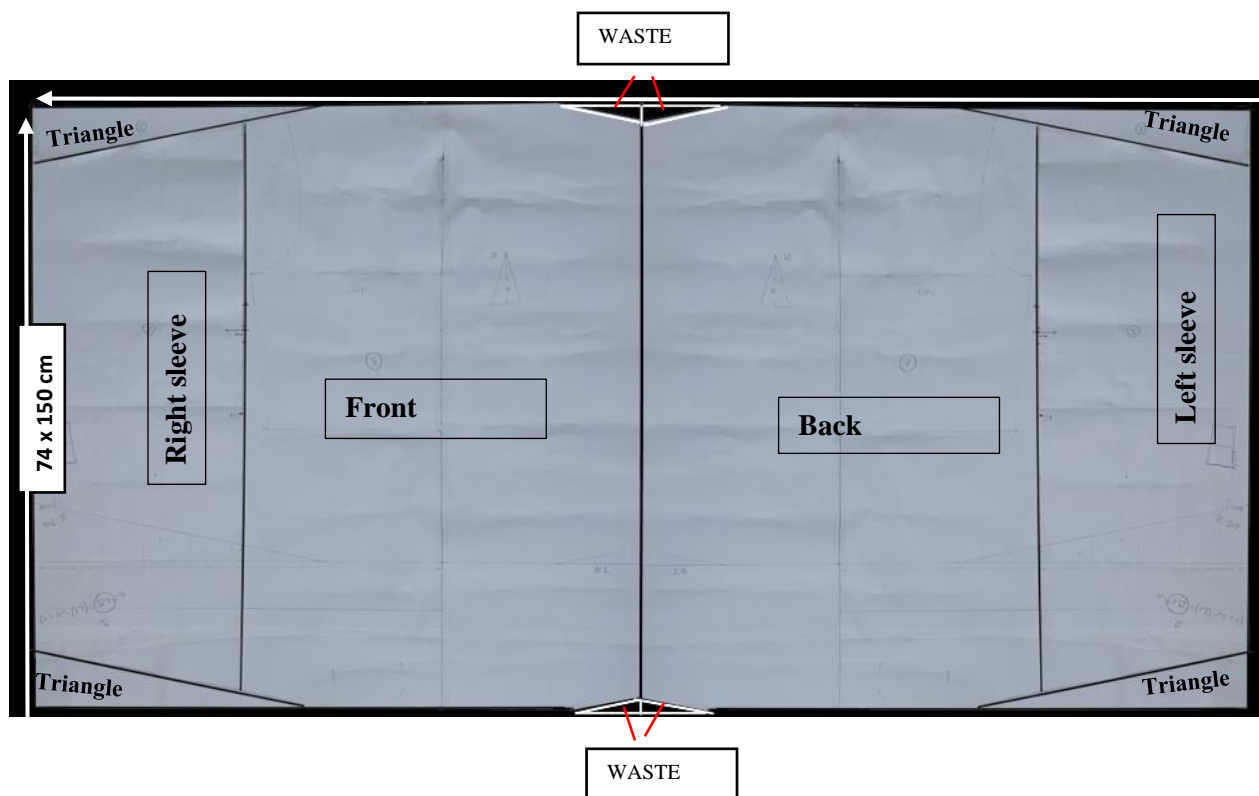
Pattern cuts of the tunic using "Geo Cut" technique and Jigsaw puzzle principle.
